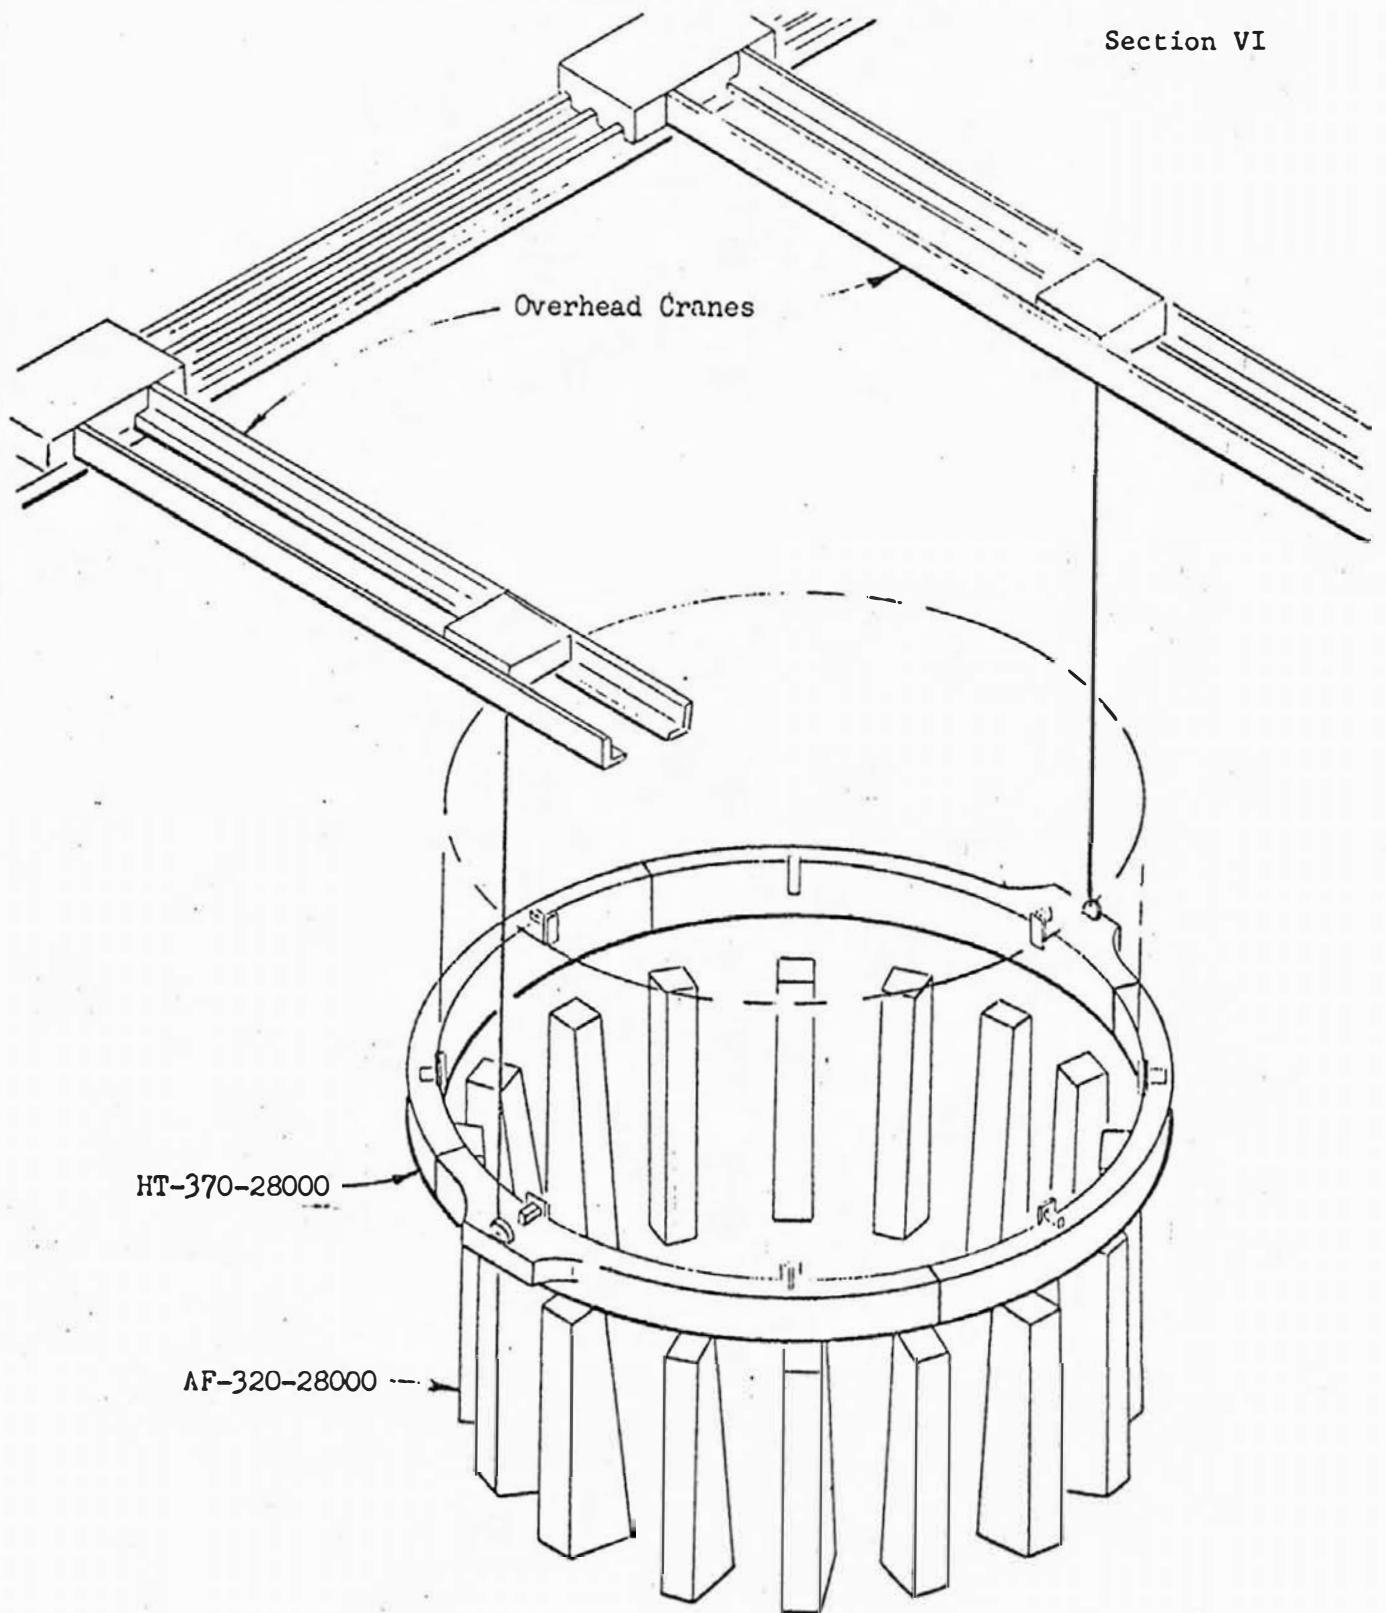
Intertank Structure Assembly Handling Tool HT-370-28000
